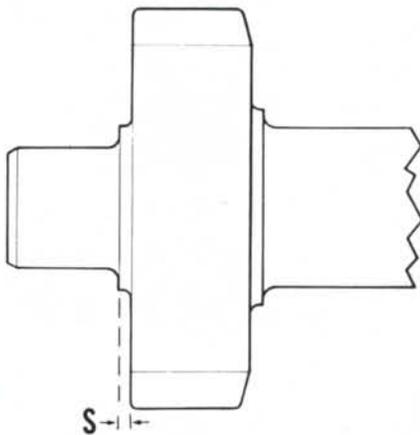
When adjusting countershaft end play, measure width of shoulder (S) on front of countershaft to determine if adjusting shims should be installed at front or rear of shaft. Refer to paragraph 251.
